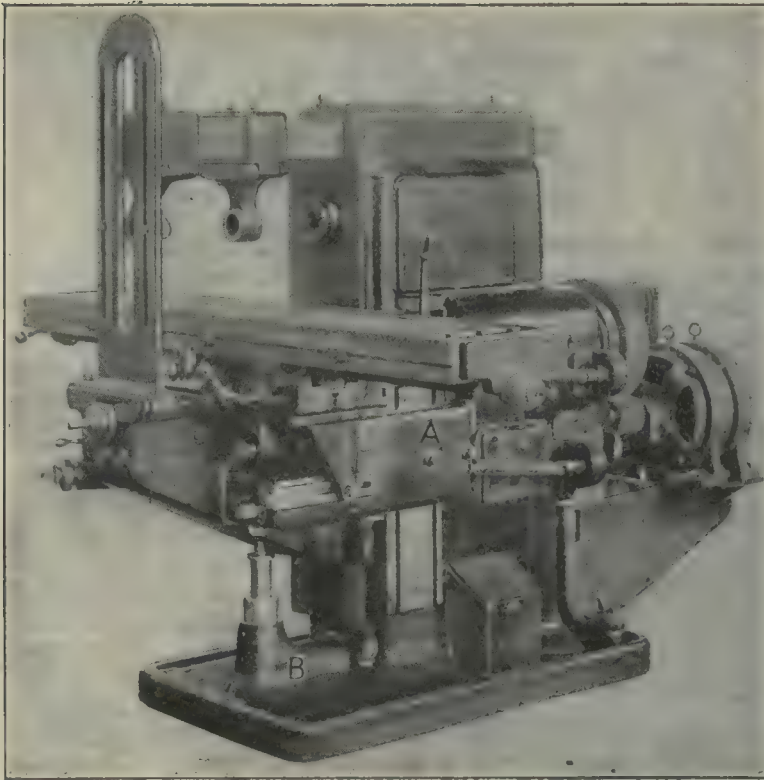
RIGHT-HAND SIDE OF MACHINE
